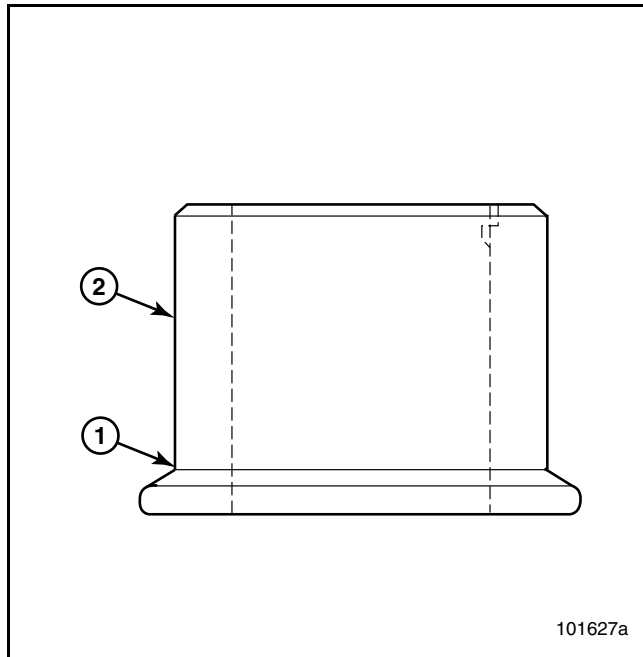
HUCK-SPIN® Collar (Transverse Cut Location)
